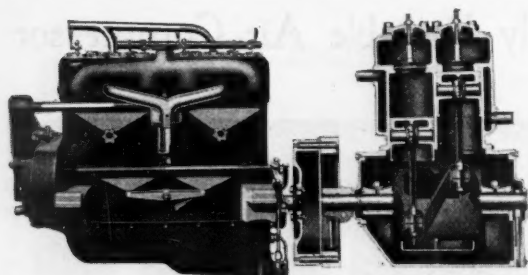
POWER PLANT SECTION OF THE SMALLER MACHINE
